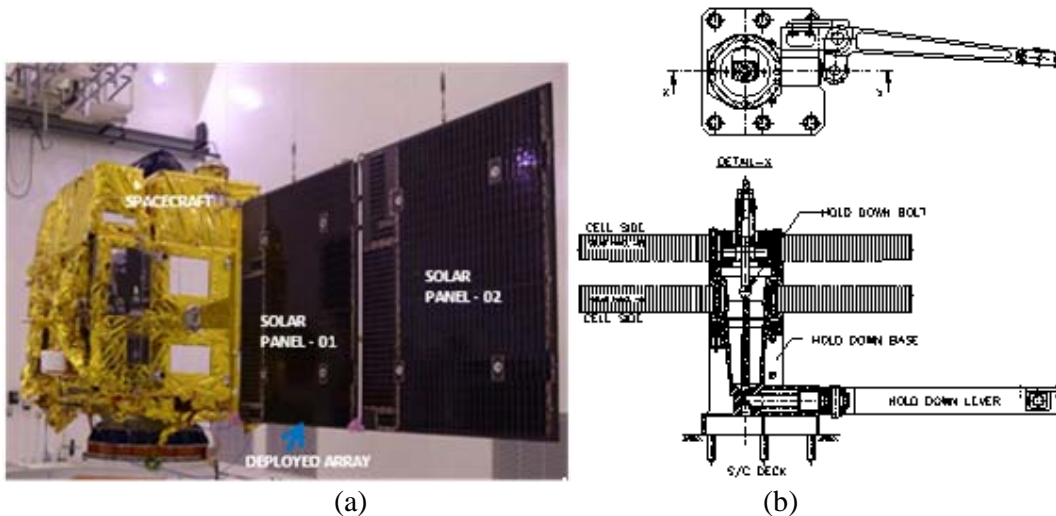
& 7b: Deployed Solar Array during ground tests and Hold down assembly
